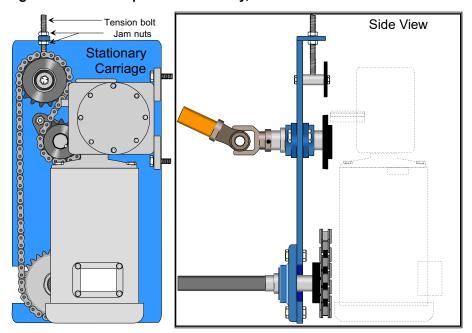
Drive Sprocket Assembly, Front and Side View
